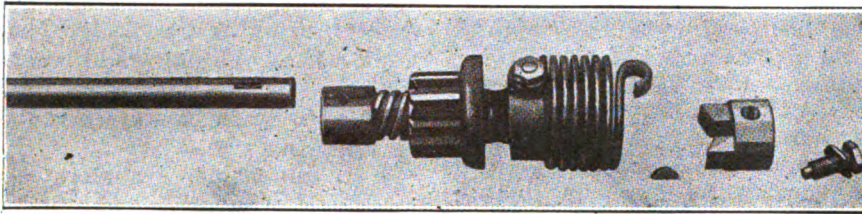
THE RELATIVE ASSEMBLY POSITION OF THE BENDIX AND STARTING MOTOR ARMATURE SHA
